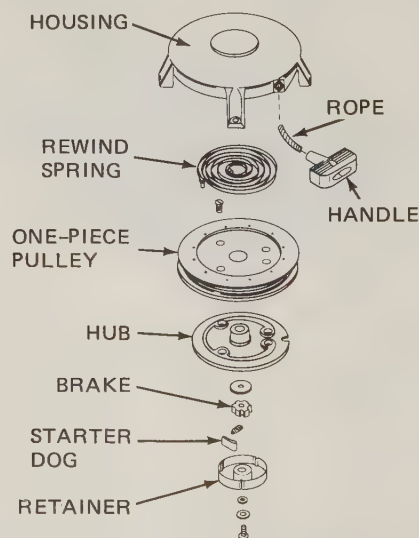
Disassembled rope-rewind starter with one-piece pulley. (Tecumseh Products Company)
